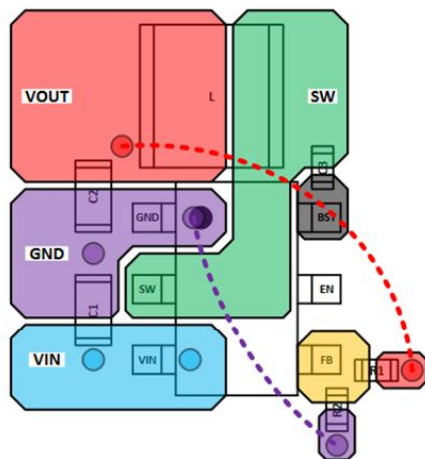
Recommended PCB Layout, TSOT26 (Standard)
